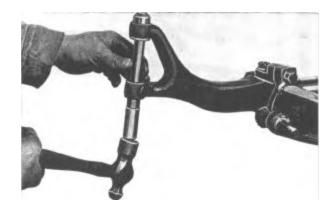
Pivot Pin and Bushing Removing and Replacing Set—Tools J-479, J-469, 3-990
